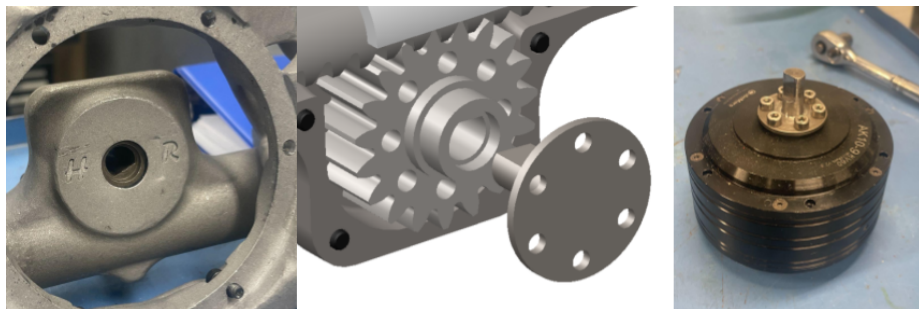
D-shaft motor collar used for direct drive to pinion gear.
